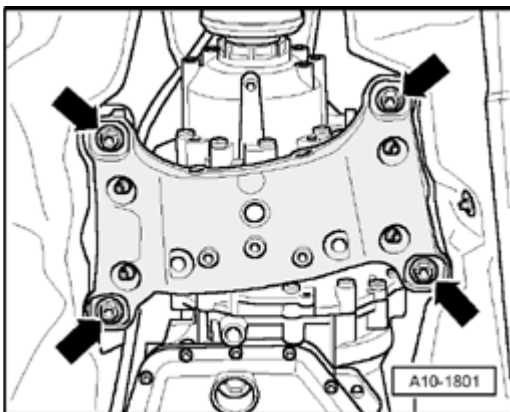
Removing/Installing Bolts At Tunnel Cross Member
